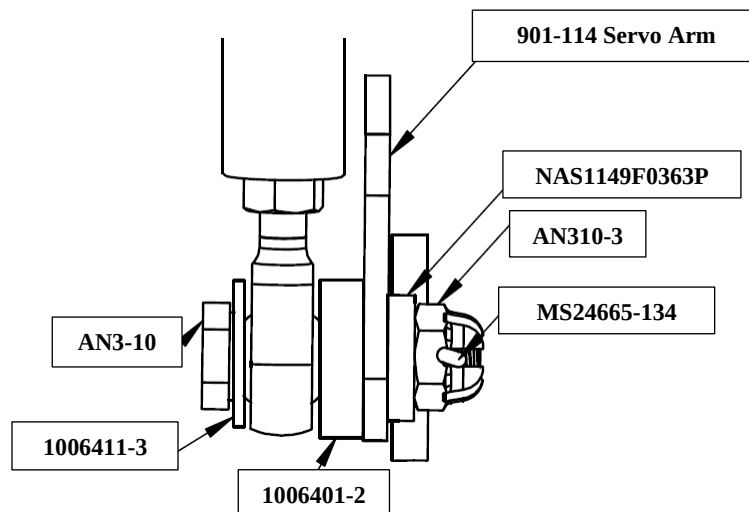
PITCH SERVO ARM CONNECTION (SERVO SIDE)
